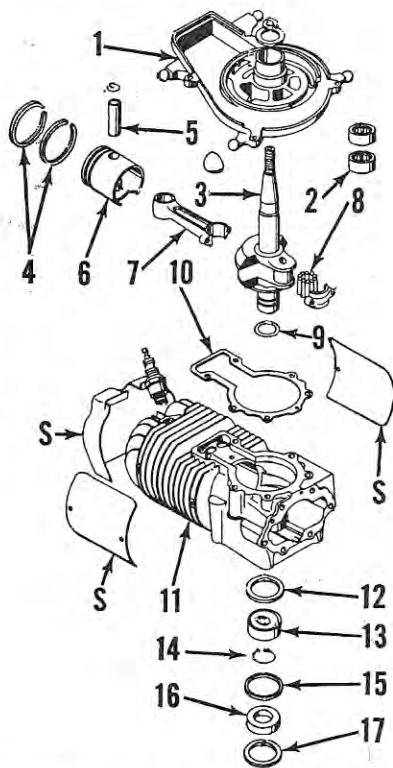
Exploded view of power head and associated parts. Refer to Fig. CL2 for intake manifold and carburetor.
